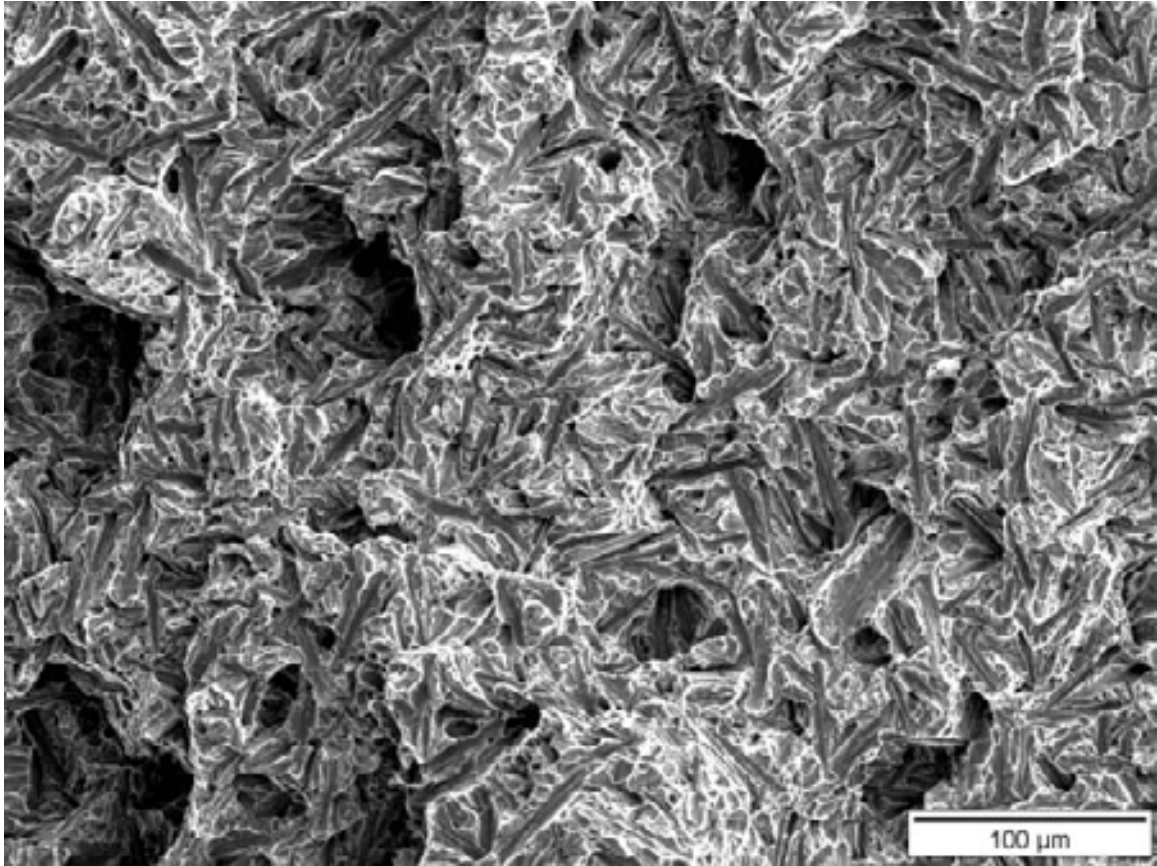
Fracture surface of compacted Ti-6Al-4V-1B modified alloy, showing brittle fracture down the length of the eutectic TiB whiskers and ductile fracture of the Ti-6Al-4V matrix.
